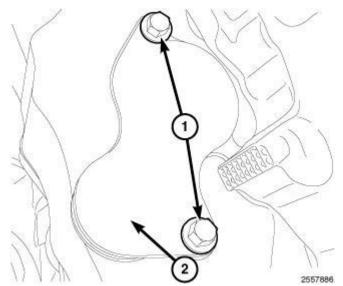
Bolts & Bell Housing Access Cover Courtesy of CHRYSLER GROUP, LLC
